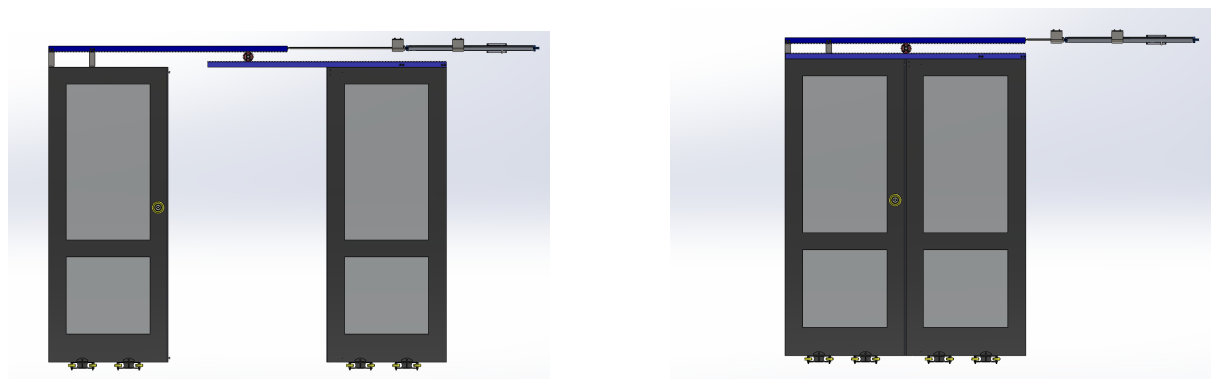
Door mechanism: opened (left) vs. closed (right) showing rack-pinion engagement.
